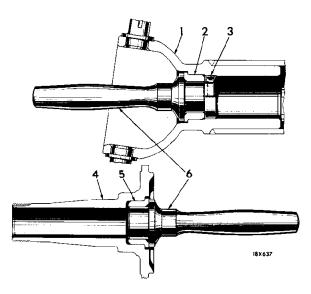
Installing Oil Seal and Bushing — Tool DD-843
